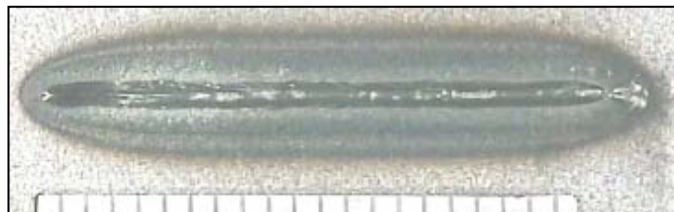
Top bead made by remote laser welding in an overlap joint: 1.2mm to 1.2mm, DC05
